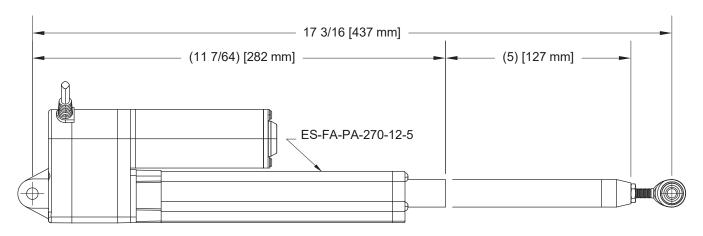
FLAP MOTOR EXTENDED & RETRACTED LENGTHS
